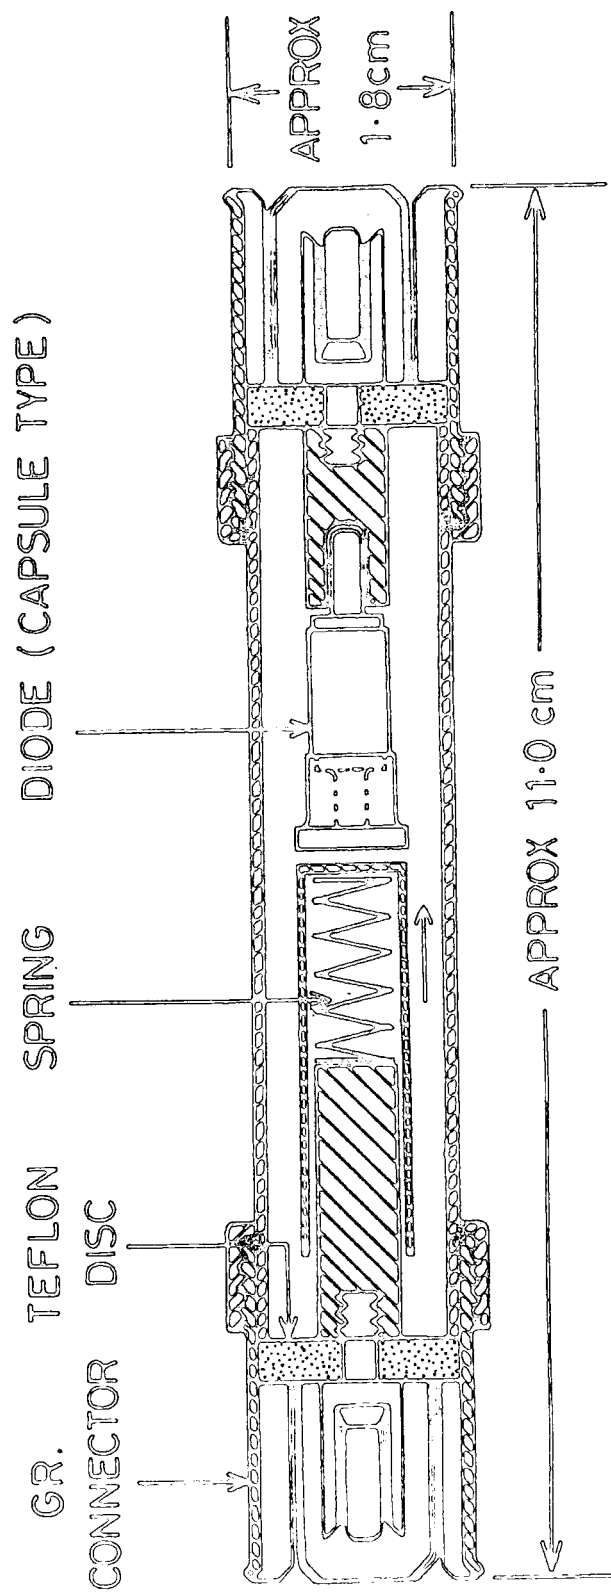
DIODE HOLDER , SHOWING CONSTRUCTION AND APPROXIMATE DIMENSIONS
